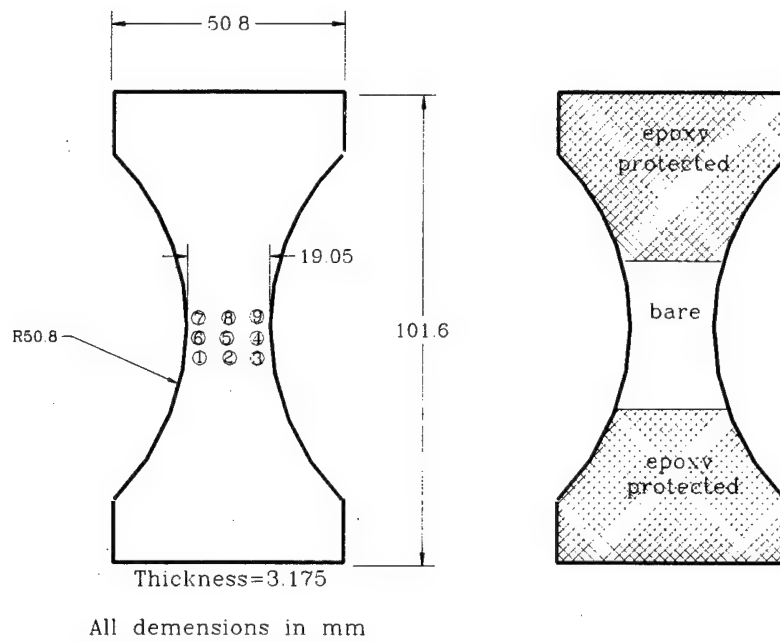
(a) Geometry of the specimens and laser beam scanning positions; (b) Epoxy coated sample. 3×3 matrix-like circle in the center of sample indicates the laser beam point position.
